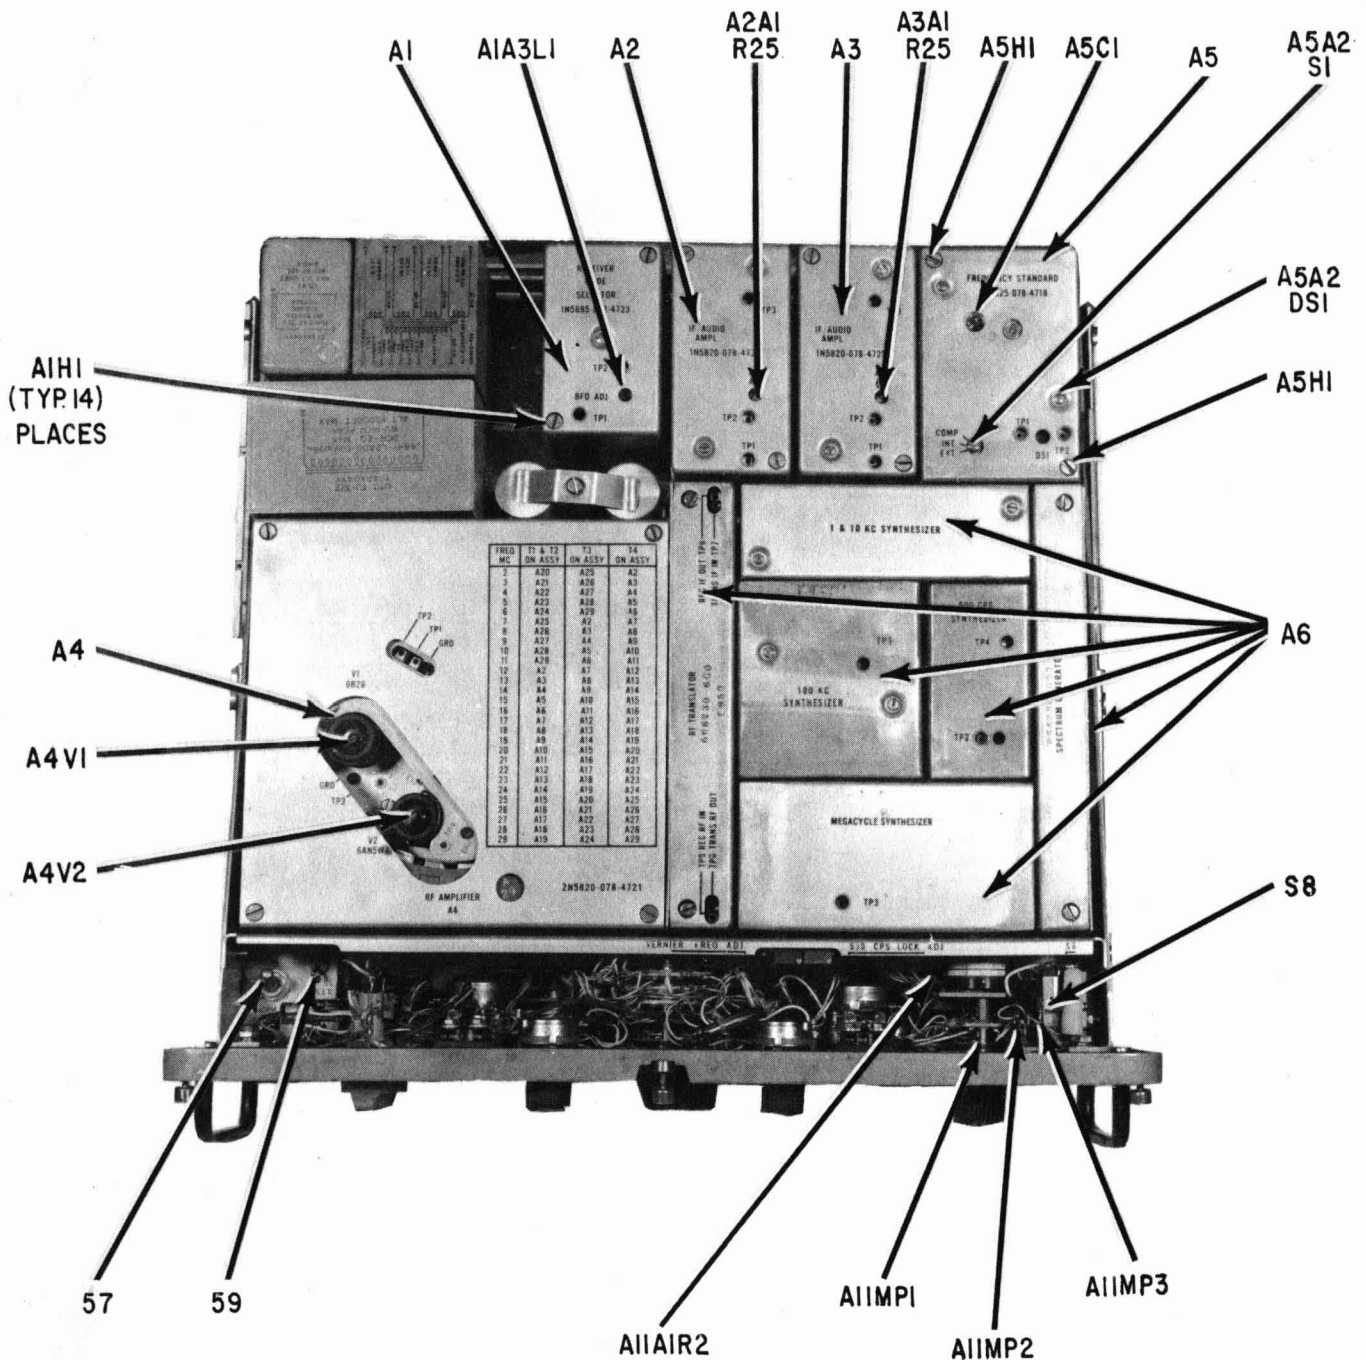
R-1051/URR Chassis Main Frame, Top View, Subassembly Location
